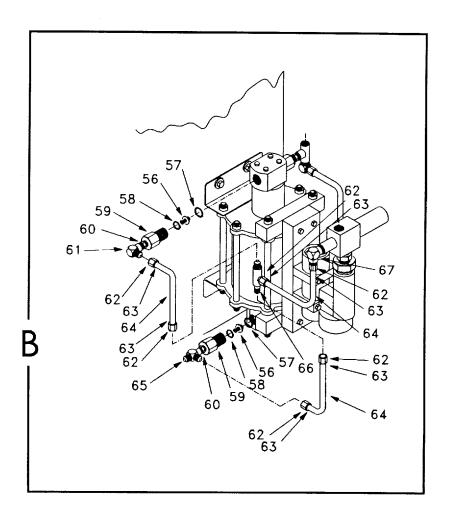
BOOSTER PANEL ASSEMBLY (PA004) (3 of 4)
